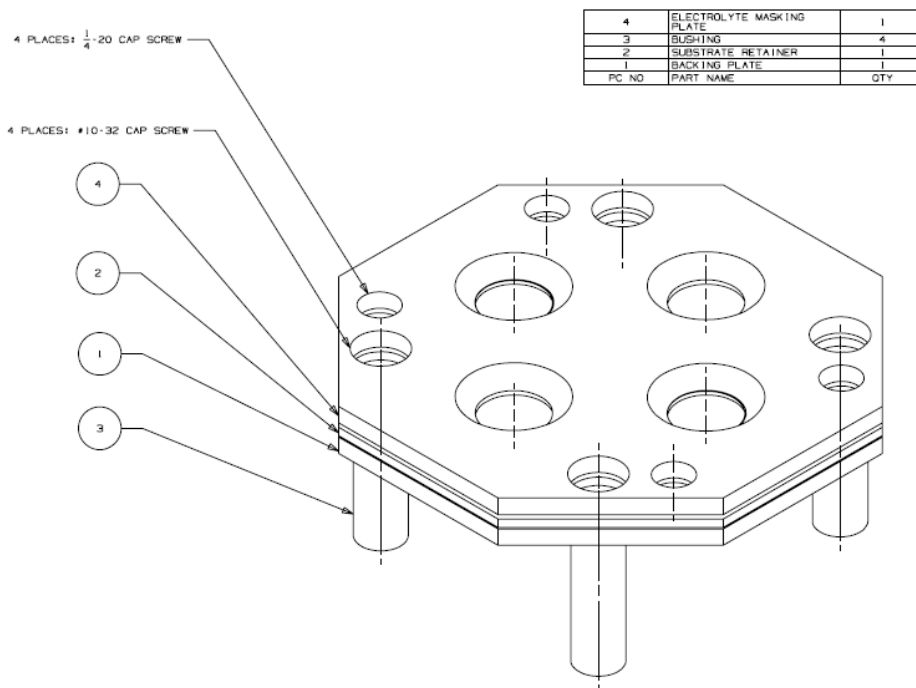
shows an assembly drawing of the mounting device. Figure A.5 shows an assembly drawing of the mounting plate.
